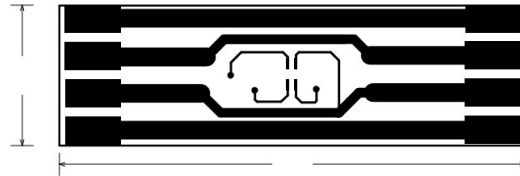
Layout for Hall sensor PCB as designed using OrCAD
